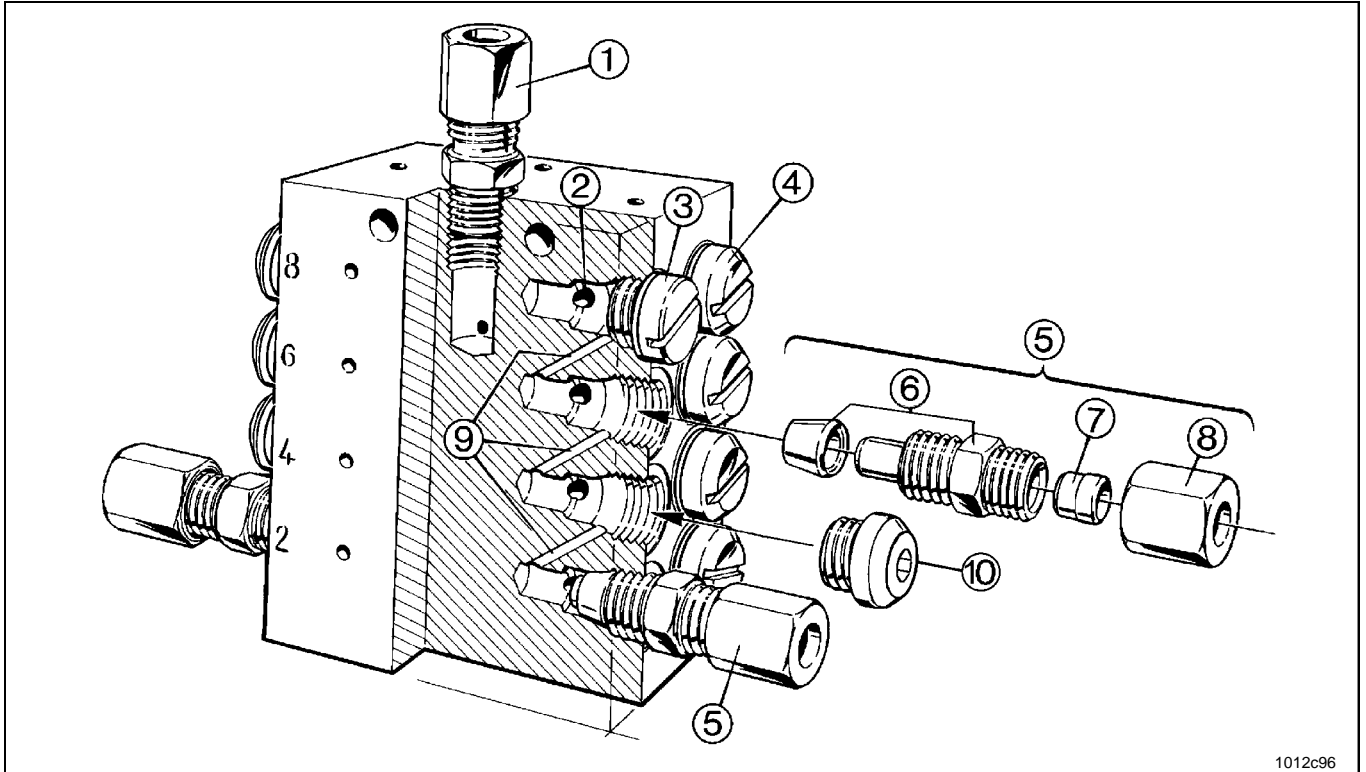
Install the outlet fittings and closure plugs in accordance with the dosage
